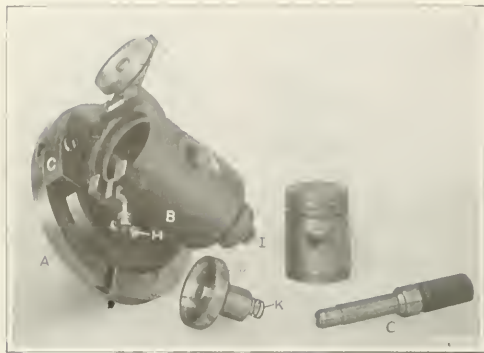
Special Fixture for holding Gas Engine Pistons for grinding Wrist-pin Holes
